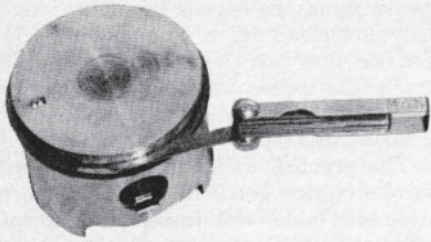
Ring side clearance in groove should be measured with feeler gage as shown. Clearance should be within recommended limits and the same all the way around piston.
